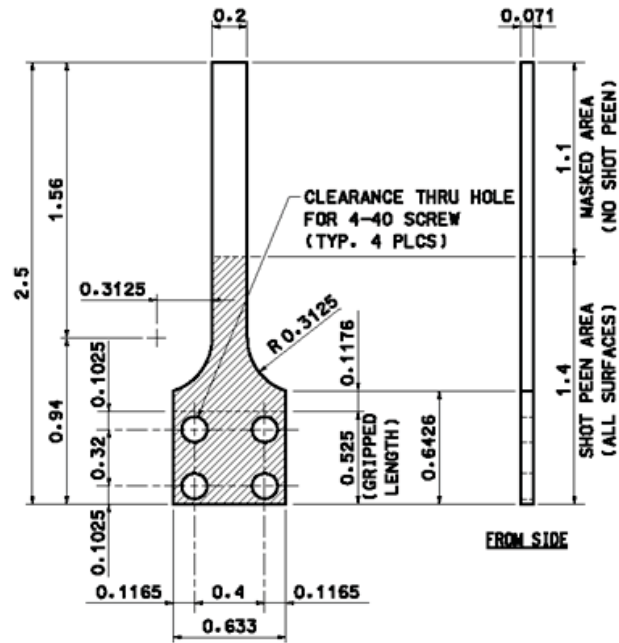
Drawing of 64 mm (2.5 in.) long specimen (all dimensions shown in inches).
